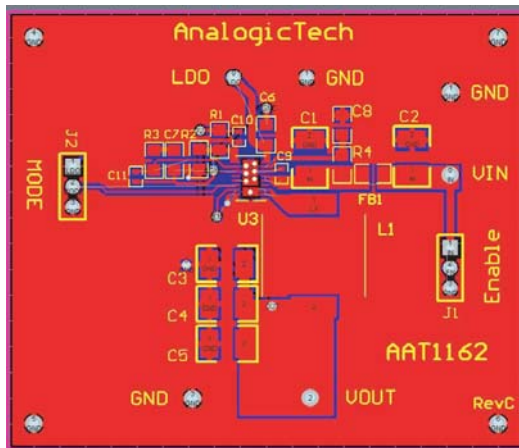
AAT1162 Evaluation Board Component Side Layout.
